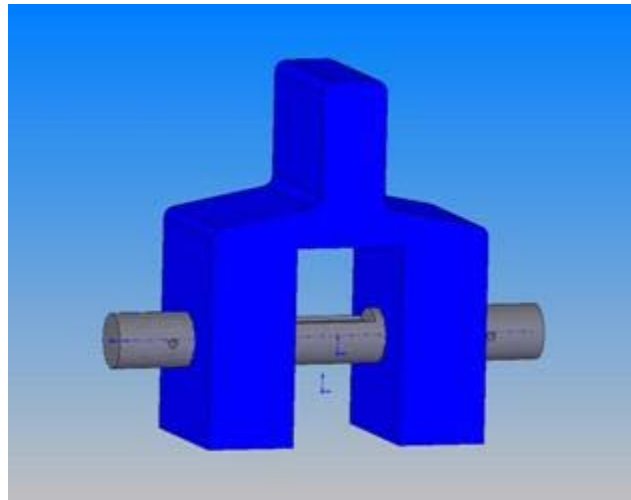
Design of holding fixture for the McKibben and single embedded sheet utilizing solidworks.
